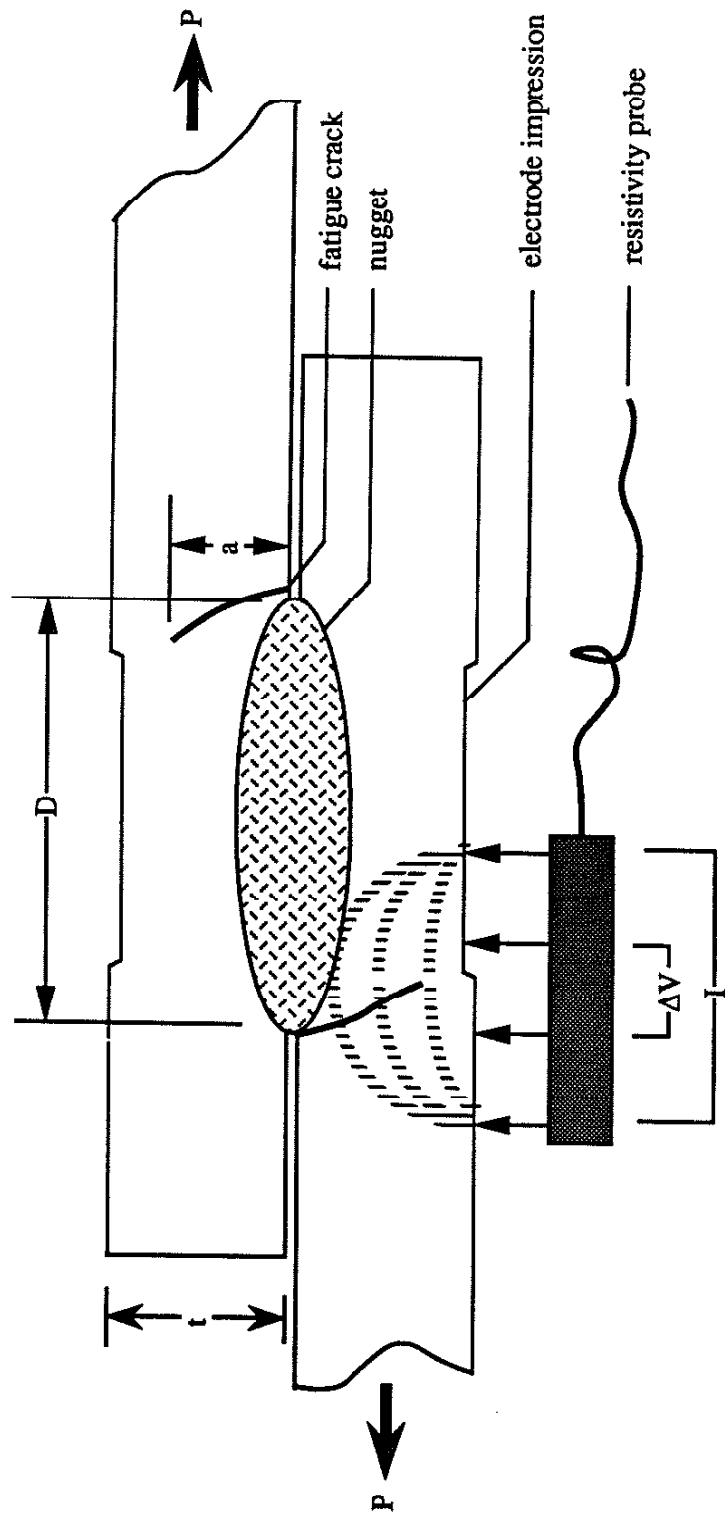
Sketch showing the location of fatigue crack development in a tensile-shear specimen and the use of the resistivity measurement probe to sense the fatigue crack development
